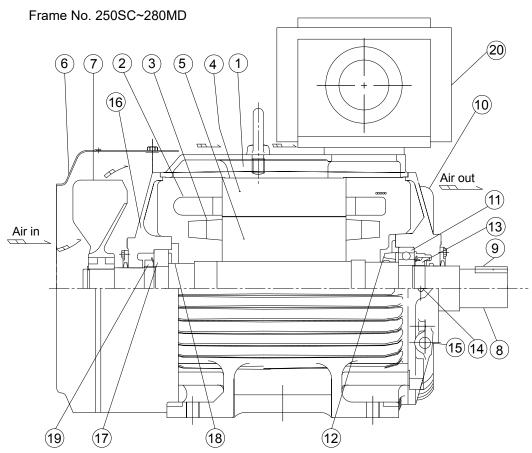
Section Drawing of Horizontal foot mount (Frame size 250SC~280MD)
